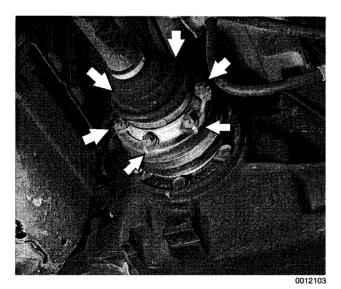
Drive axle to final drive mounting bolts (arrows).
